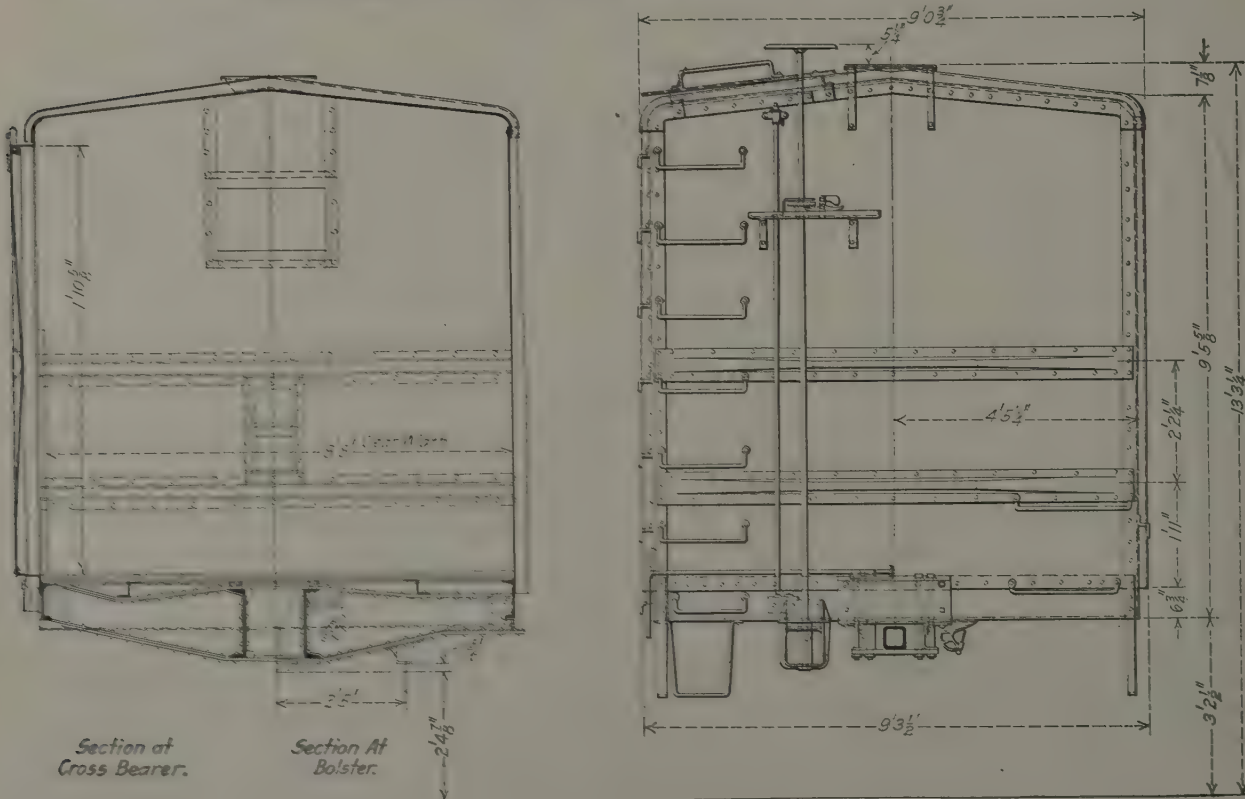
End Elevation and Cross Sections of Canadian Pacific Steel Box Car Shown in Figs. 10 and 12.
